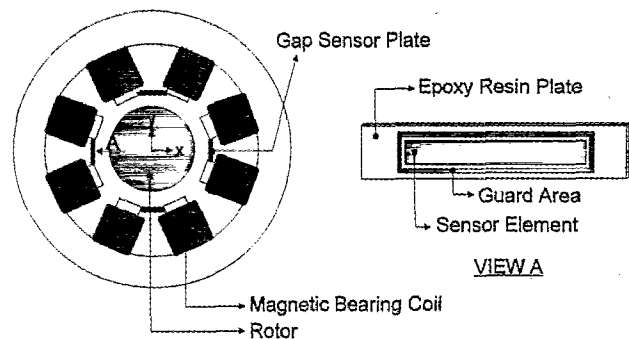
Collocated sensor built in the magnetic bearing and the shape of the sensor plate.
